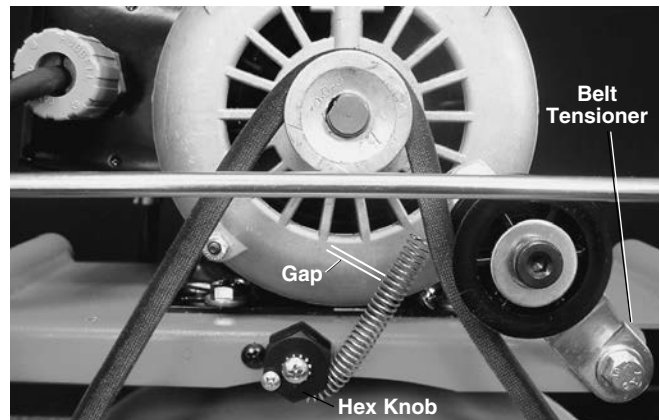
Torque Limiter Adjustment. (Shown With Belt Guard Removed)
